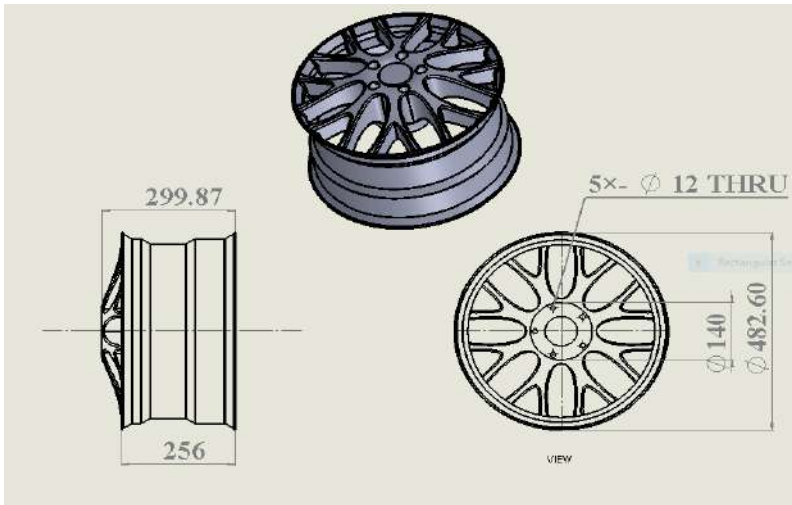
CAD drawing of design of wheel casting (all dimensions are in mm)
